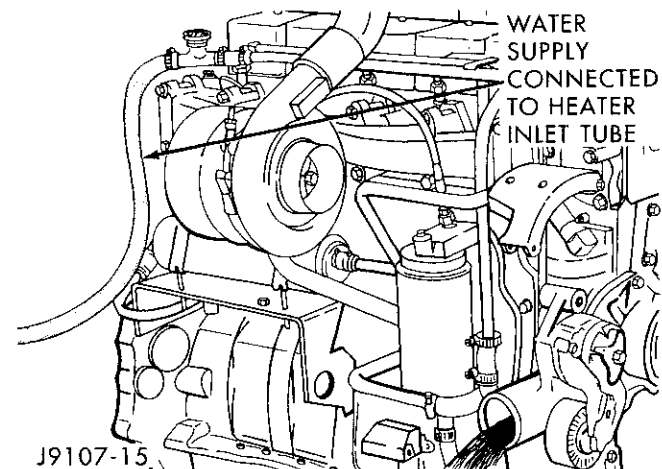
Typical Reverse-flushing—5.9L Diesel
